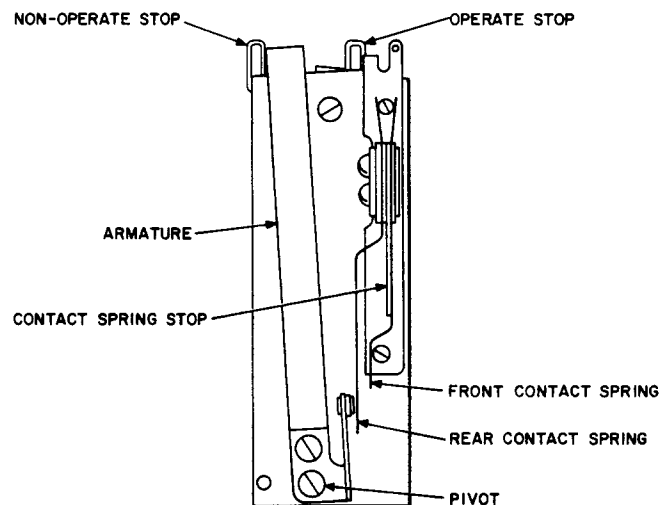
85P-Type Relay — Arrangement of Operating Parts
